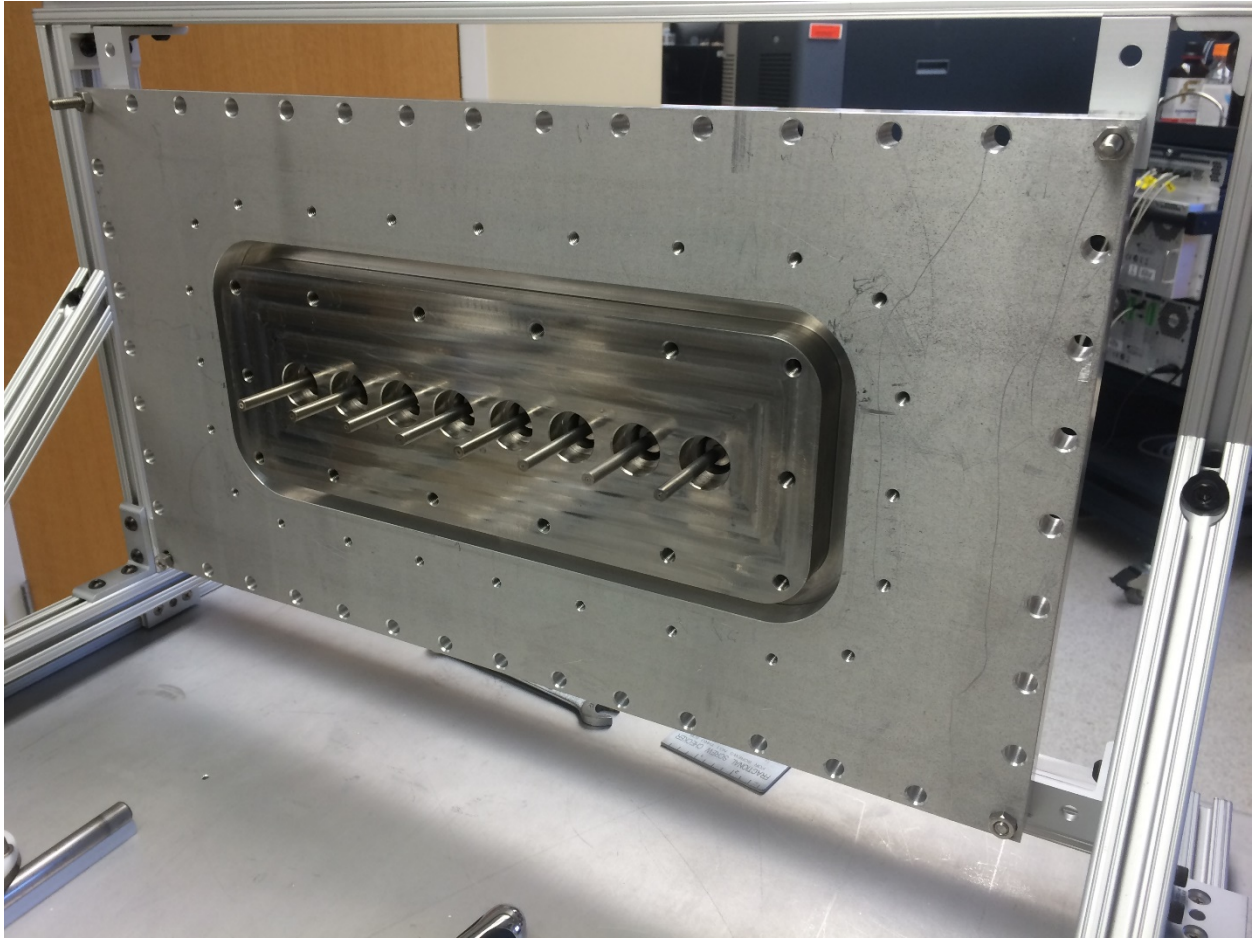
Narrow drift tube mounted on aperture panel, with piston seal Delrin piece installed, and assembled free and resting on table
